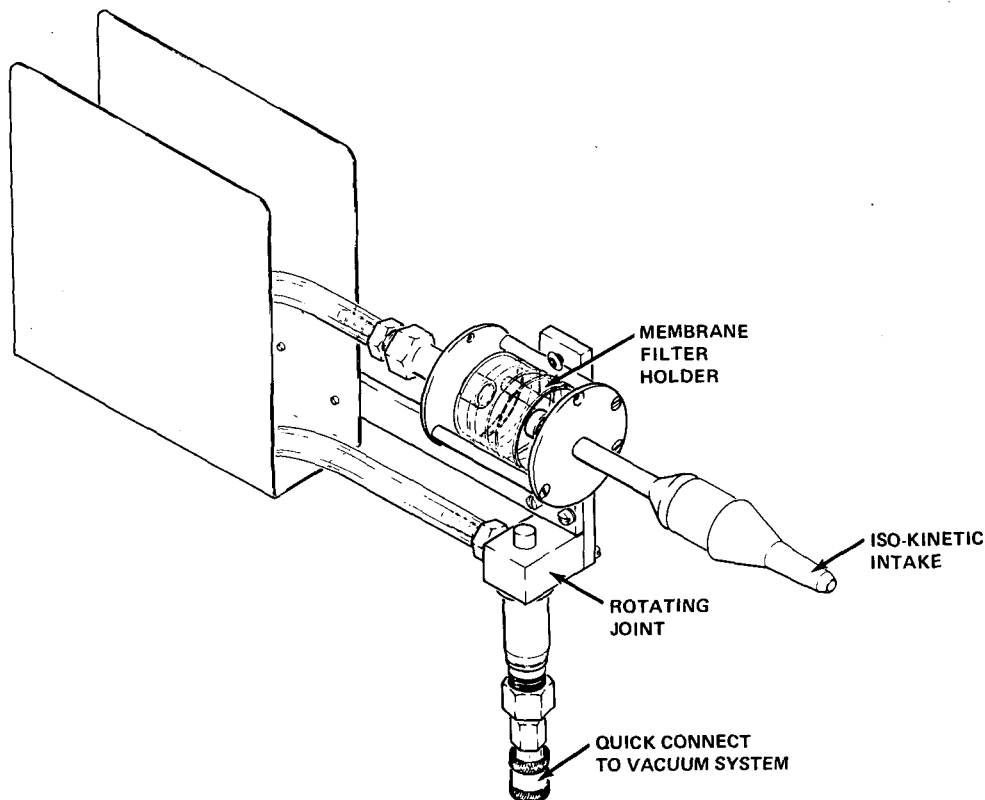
The mechanical arrangement of the filter and filter-holder assembly.
